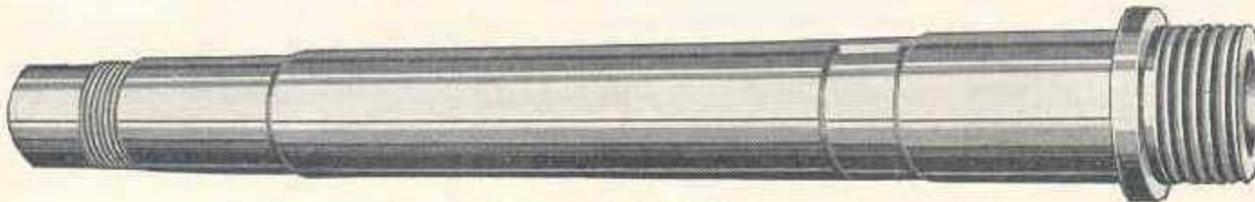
Hollow Carbon Steel Spindle Finish Ground All Over.
